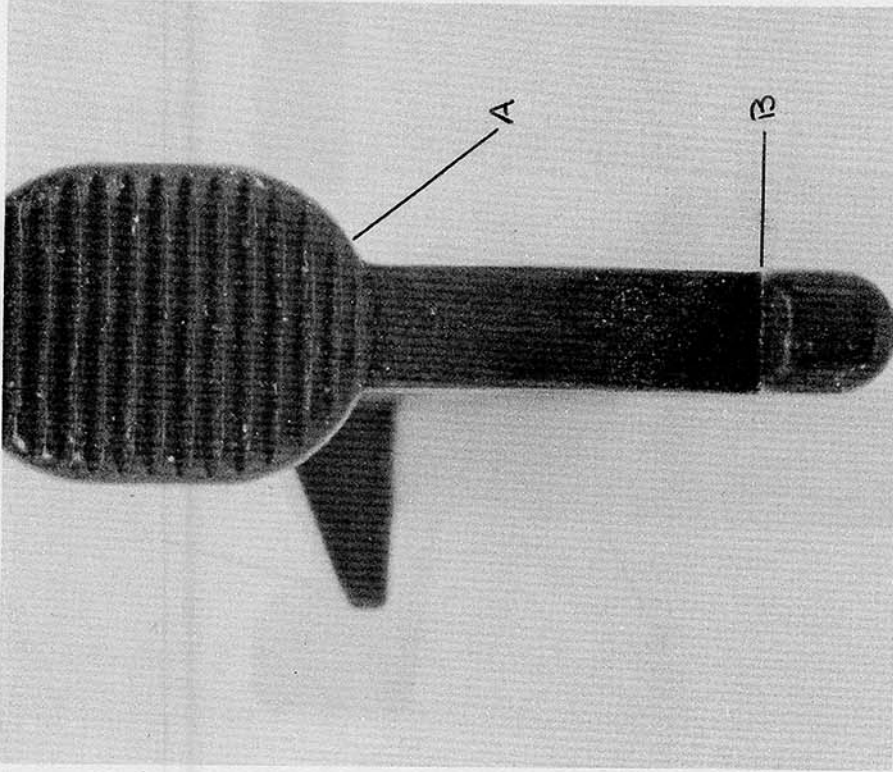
Colt M16A1 rifle bolt catch left side view.
